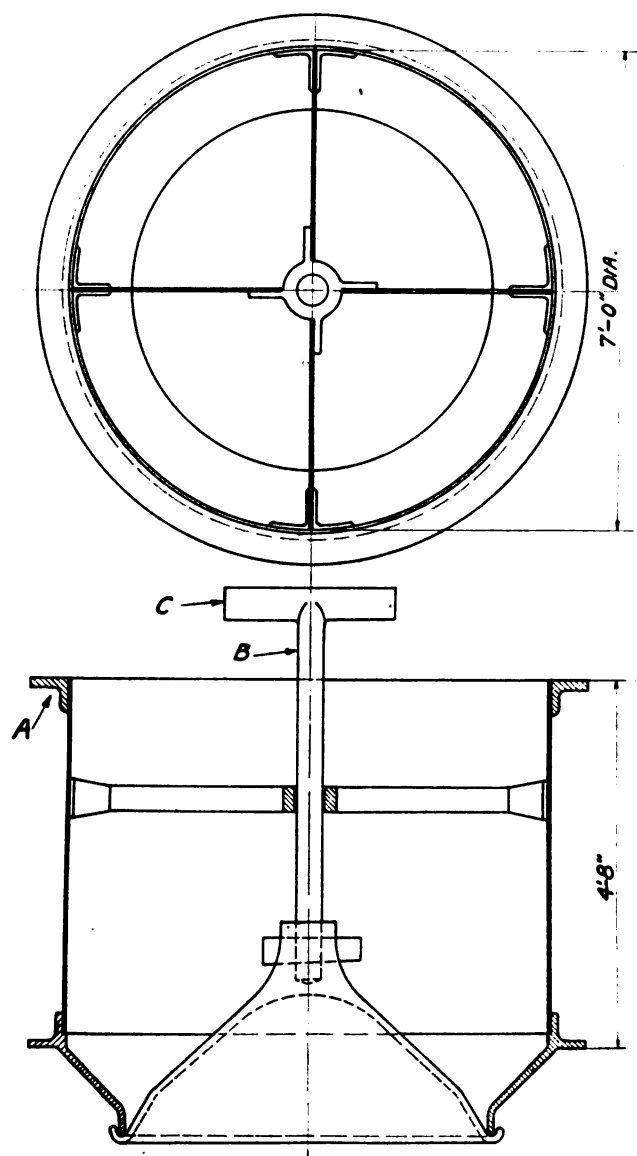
Cross-section and plan view of bucket type used on one-man fuel handling system.
